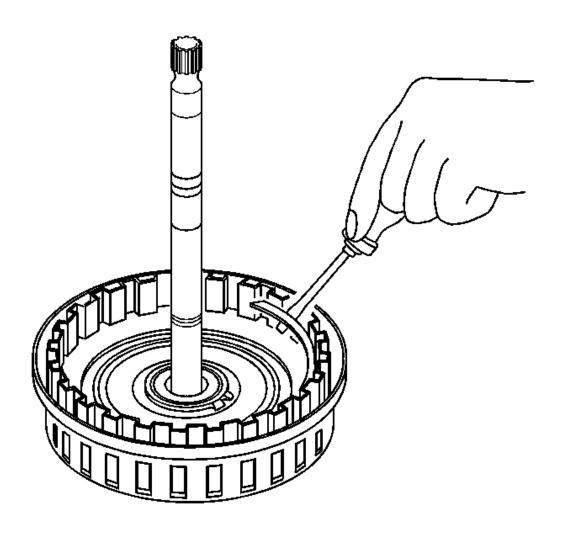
1-2-3-4 and 3-5 Reverse Clutch Plates Removal Courtesy of GENERAL MOTORS CORP.
